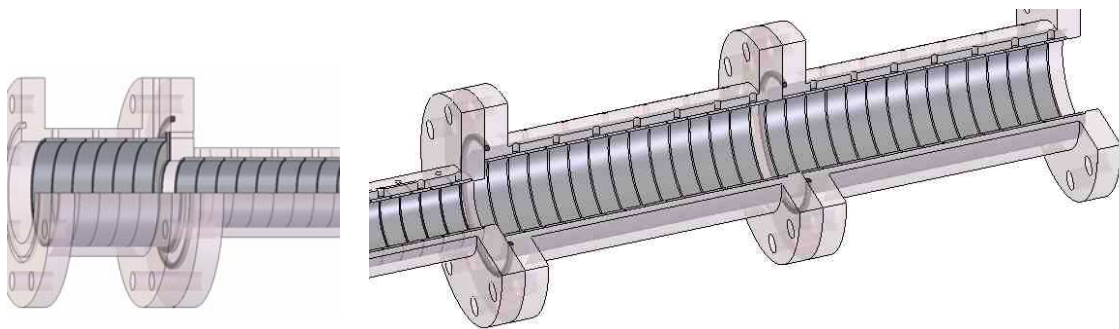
Sectional view of the test section showing the pipe constriction and expansion.
